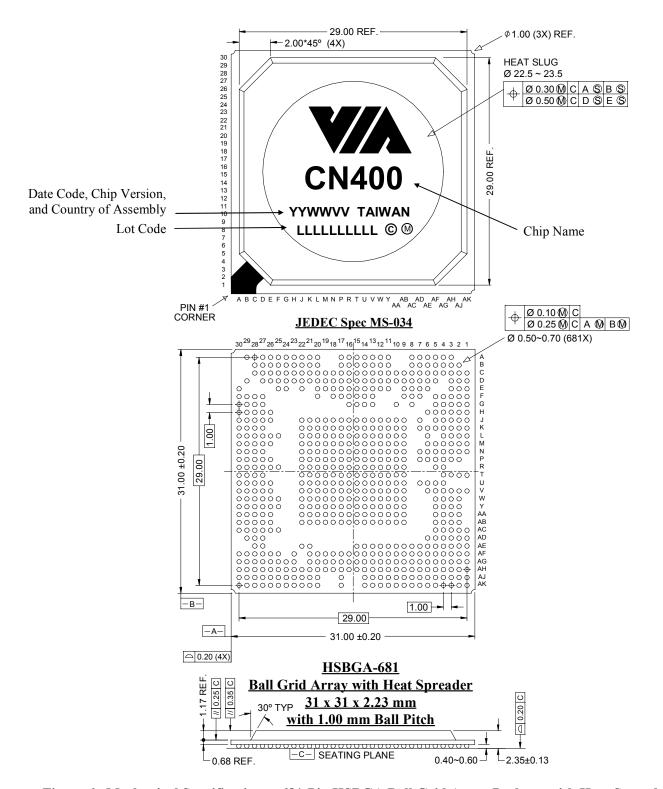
Mechanical Specifications - 681-Pin HSBGA Ball Grid Array Package with Heat Spreader
